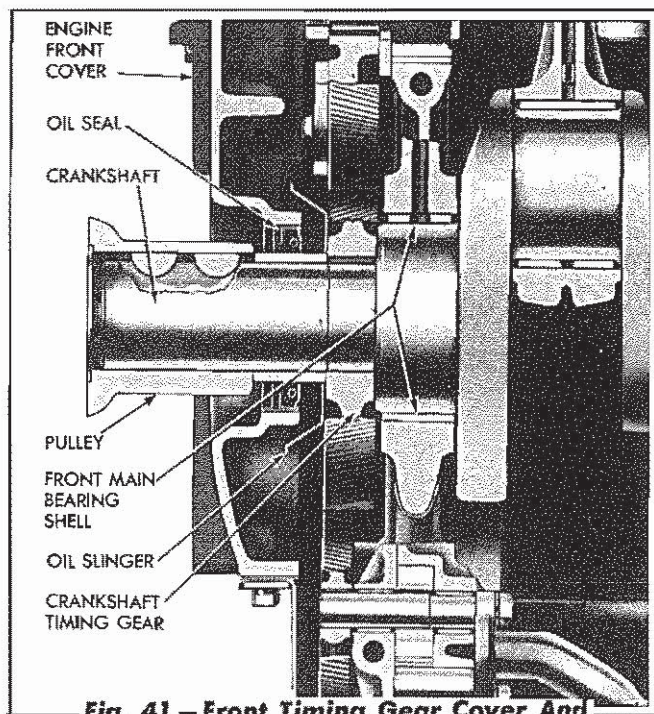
Front Timing Gear Cover And Crankshaft Oil Seal Assembly
